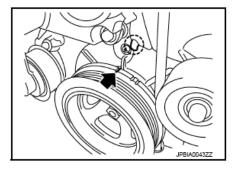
Locating Timing Mark On Crankshaft Pulley Courtesy of NISSAN MOTOR CO., U.S.A.
